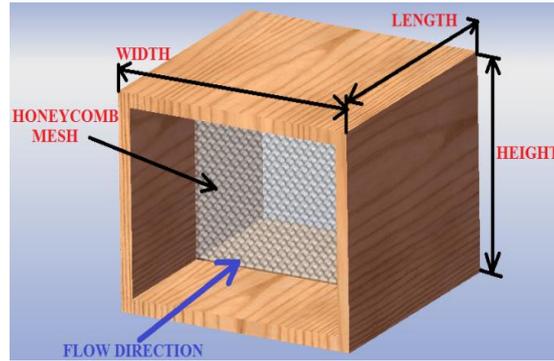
Isometric View of The Settling Chamber developed using Solid-Works
